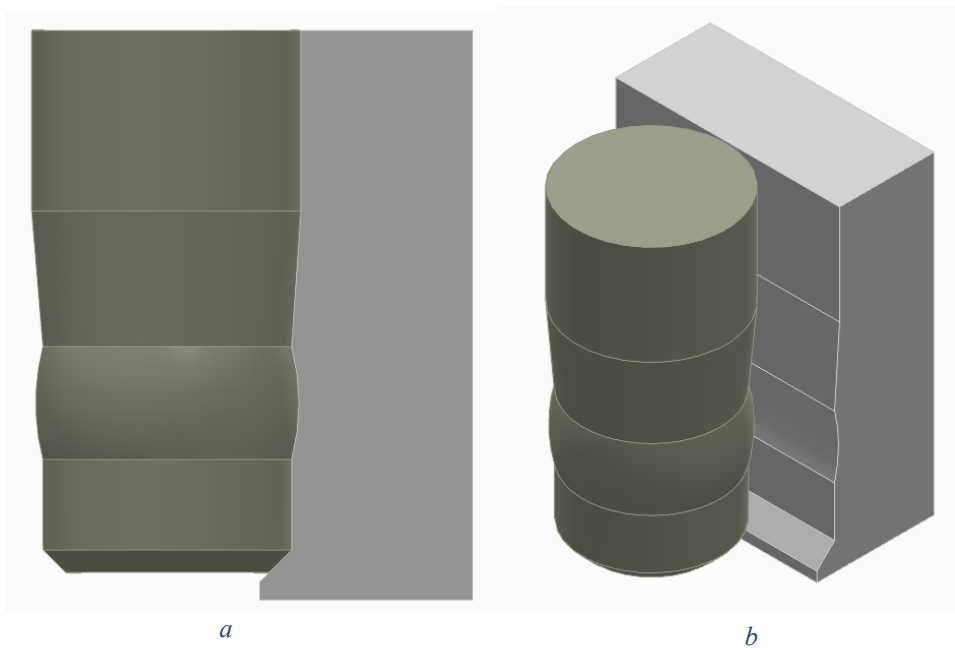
The assembly of the tool and the workpiece where a) Front view b) Isometric view
